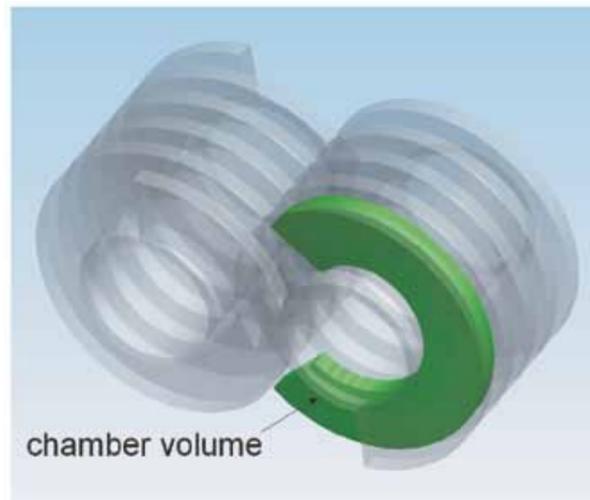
C-shaped conveying chamber in a twin-screw pump or motor
